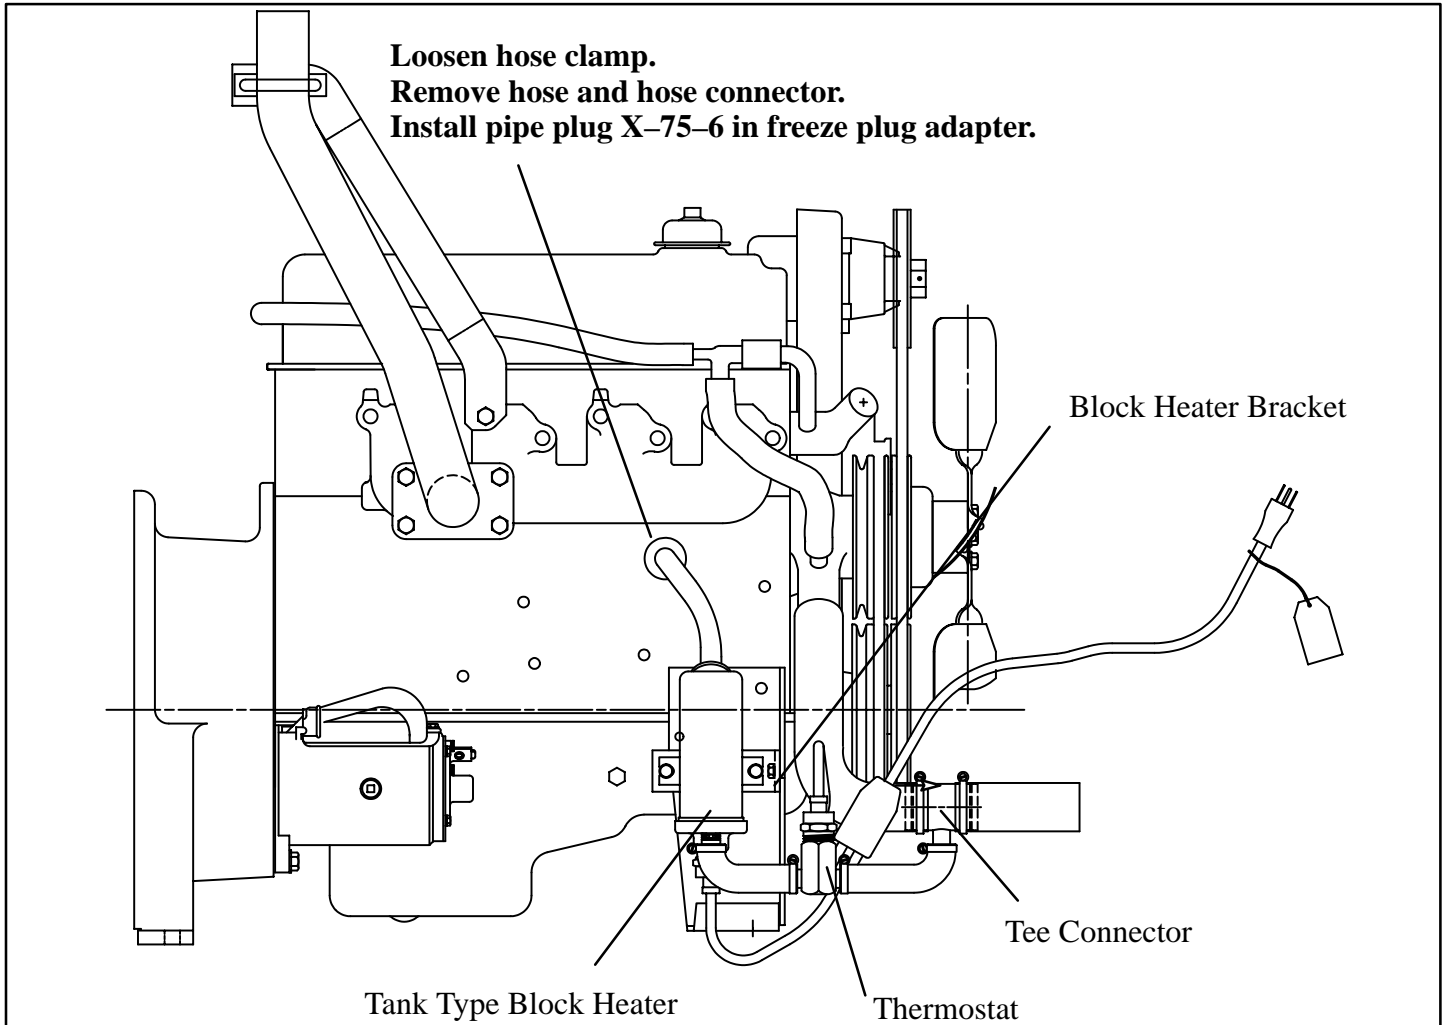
Removal of Early Version Tank Type Block Heater Kit
